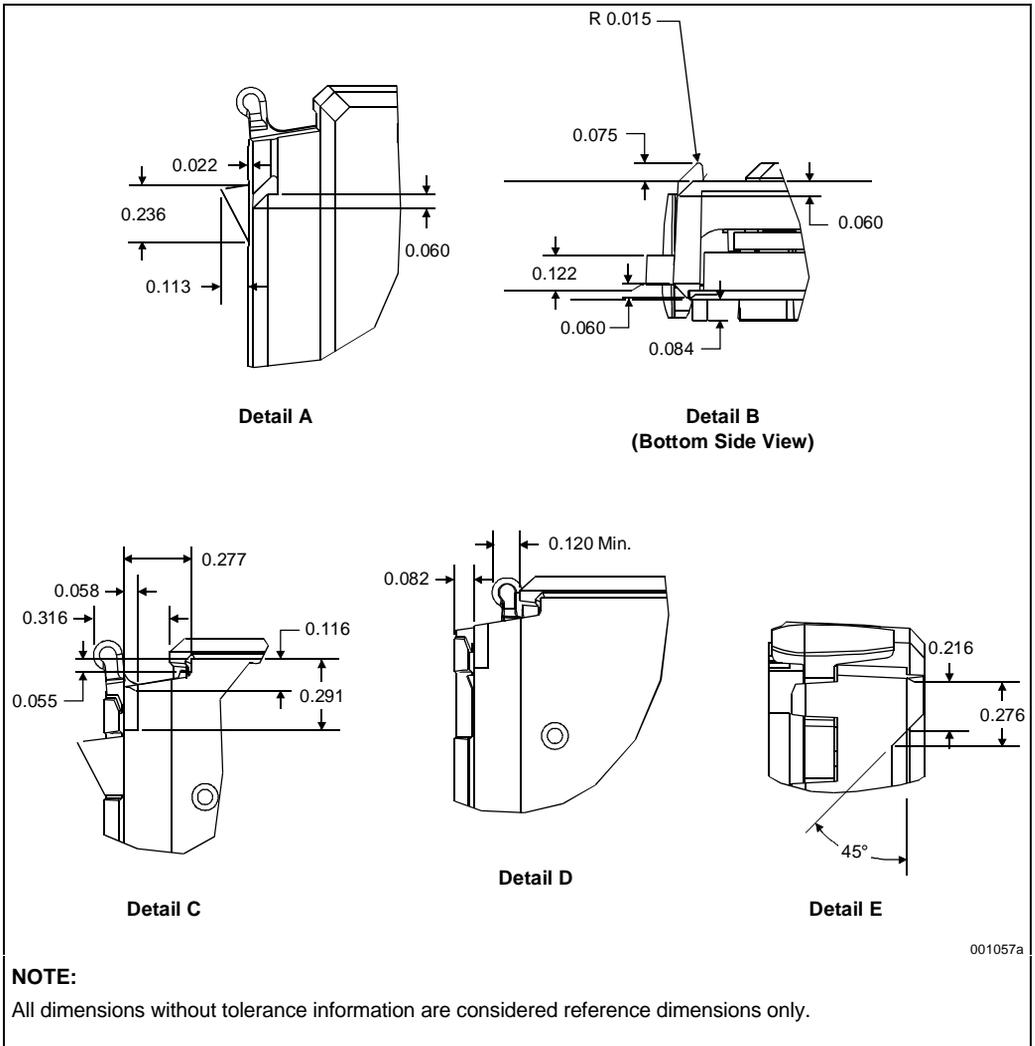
S.E.C. Cartridge Latch Arm, Cover and Thermal Plate Detail Dimensions
